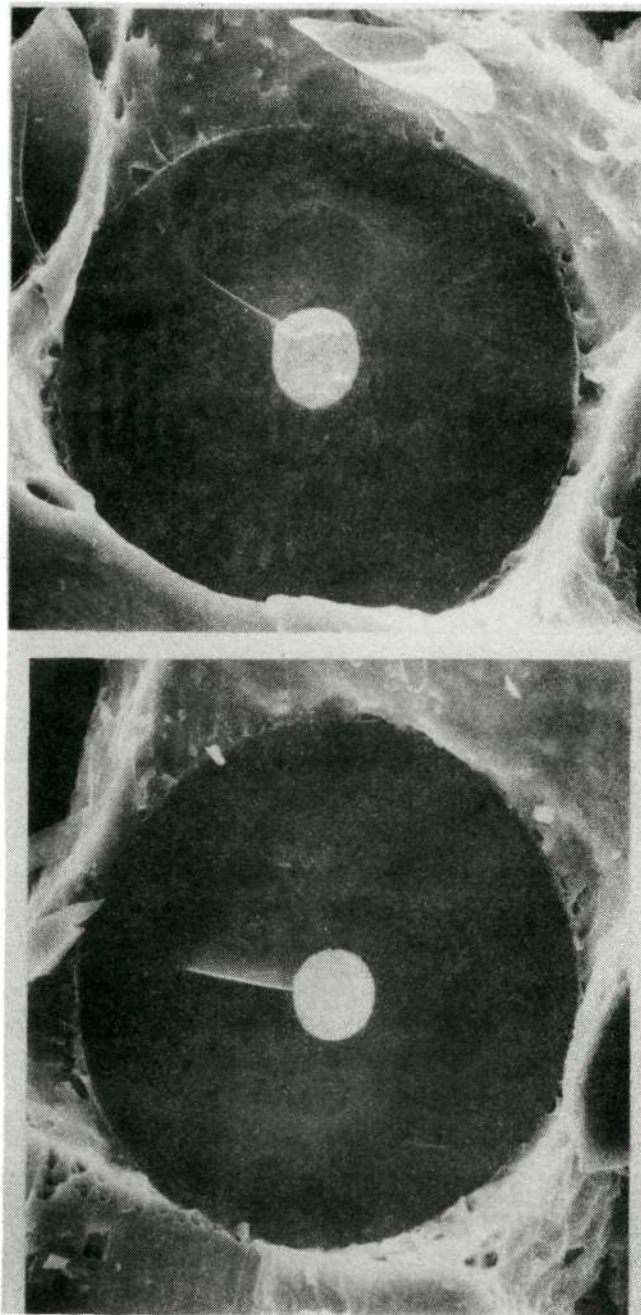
Matching, 3.9 mil diameter filament fracture surfaces in canted fracture region: (a) unbonded strip on side of exposed filament; (b) corresponding unbonded area in opposing surface.
